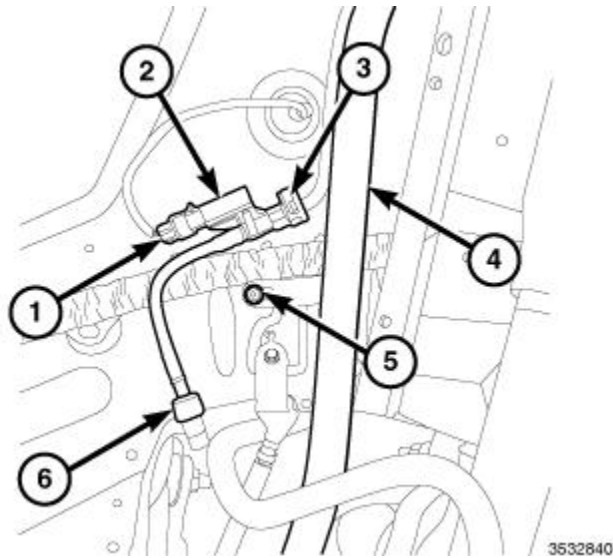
Fuel Tank Pressure Sensor Electrical Connector, Filler Tube & Fuel Tank Vent Steel Line
